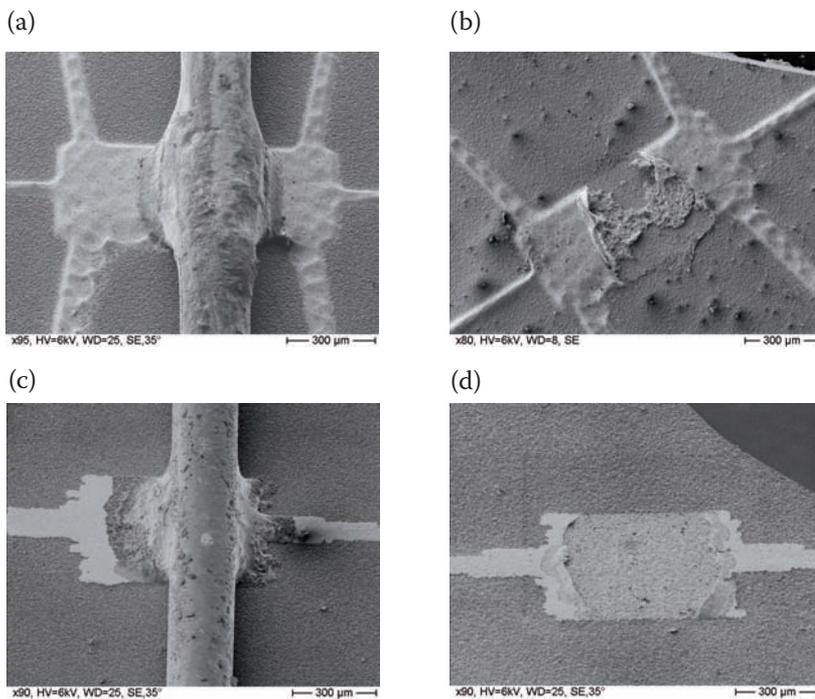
SEM images of soldered Cu wires in cell metallization pads, and their main fracture mode after the pull test: (a-b) screen printing; (c-d) Ag plating.
